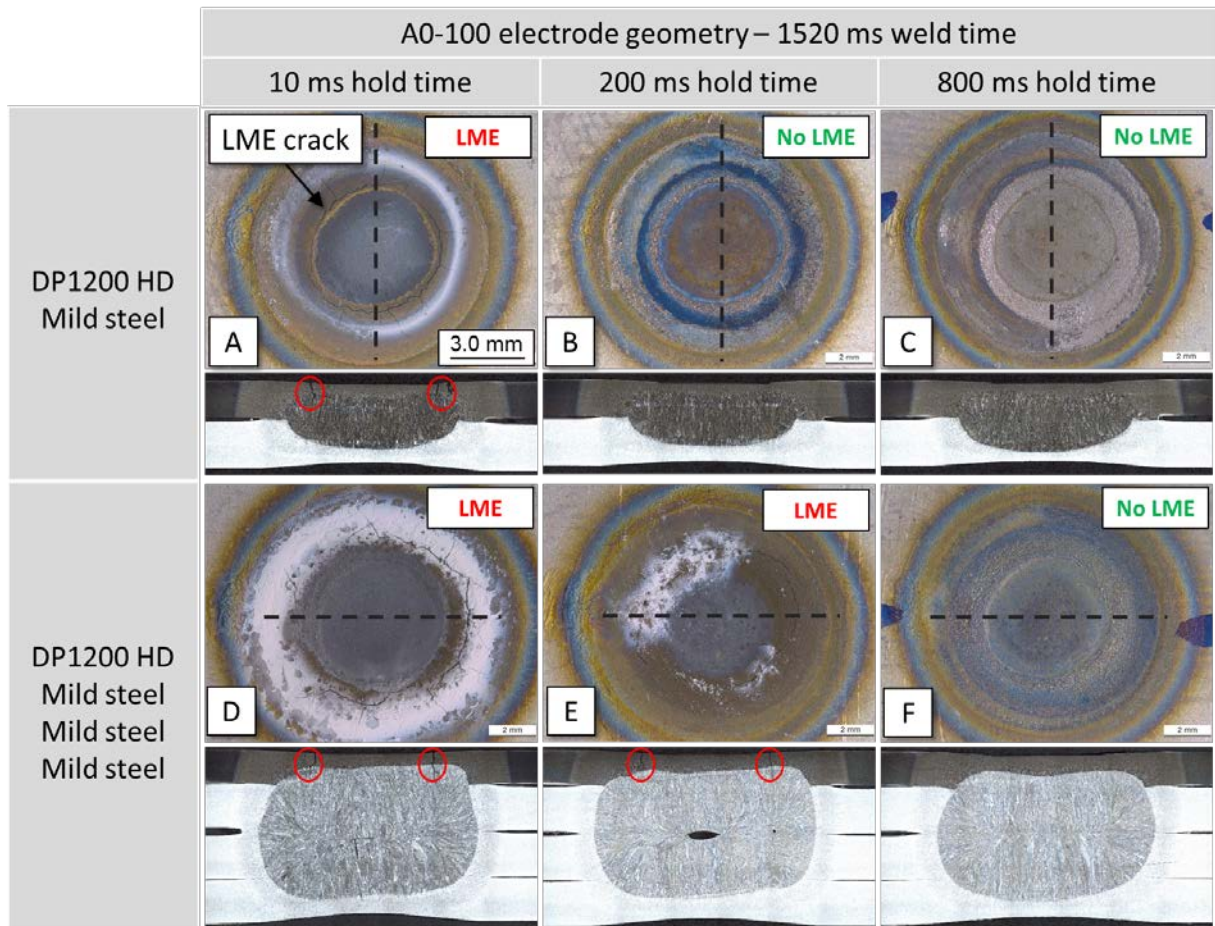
Weld process results from the three investigated hold times (left to right) and stack-ups (top and bottom) via surface view and cross-section.
